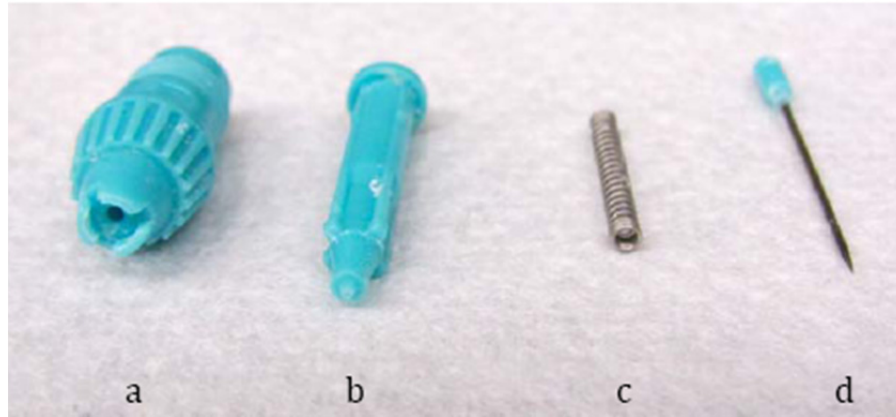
Spray gun nozzle components: a) Nozzle; b) Internal pin holder; c) Spring for spray thickness control; d) Pin for spray thickness control. Nozzle assembly with and without c) & d) allows for thin vs. thick sprays.
